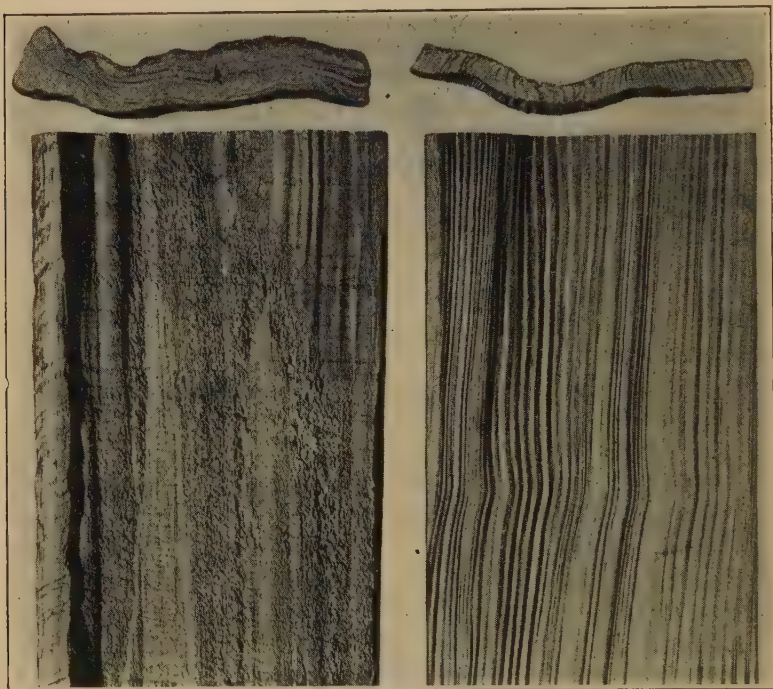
Western red cedar board (left) and shingle (right) collapsed in kiln drying. Top pieces are cut off ends.
